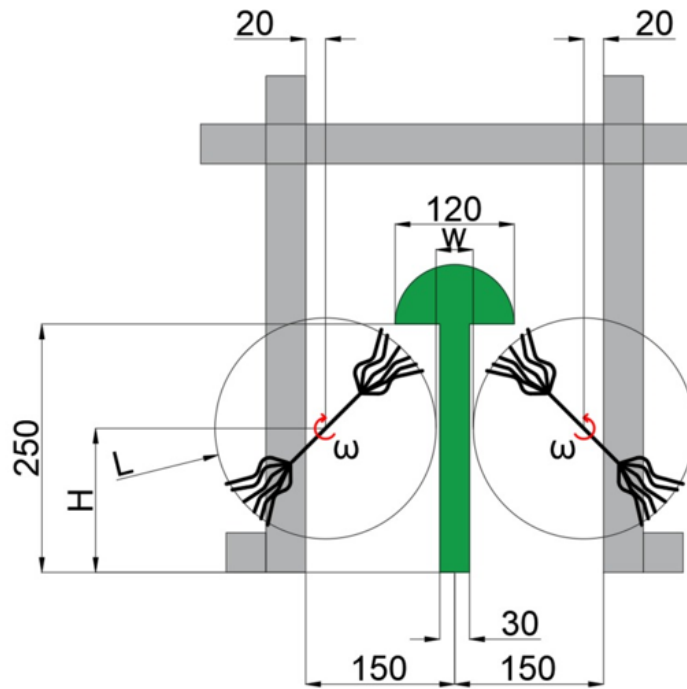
Schematic drawing of the front view of the Metal Wire mechanism with example broccoli
